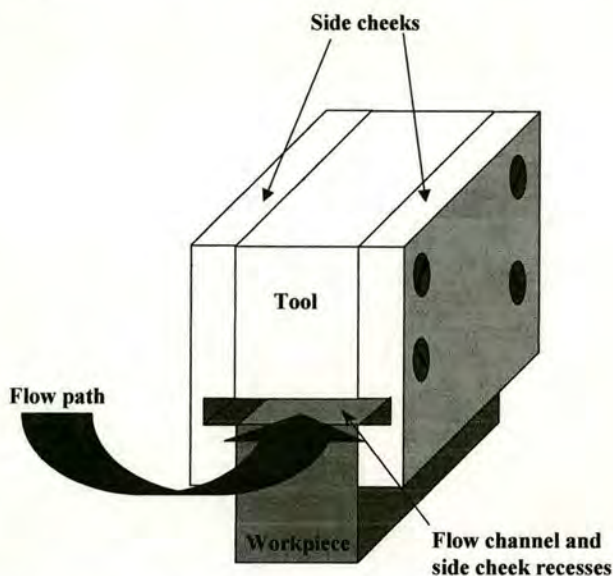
General tool and workpiece configuration. The recesses are shown exaggerated for clarity.
